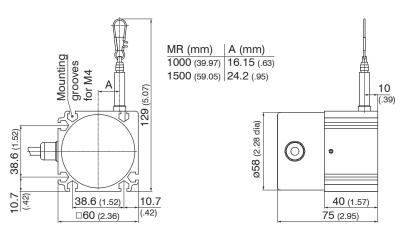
Dimensional drawing ... - FD60 - CR - HTL/TTL, dimensions in mm (inches), not to scale
